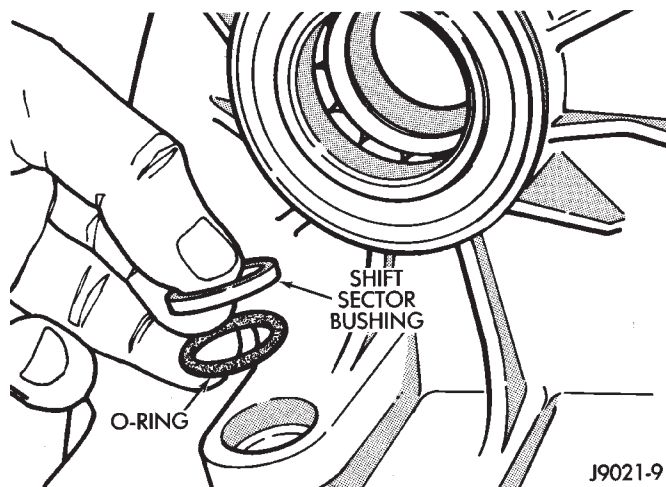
Removing/Installing Sector Shaft Bushing And O-Ring
